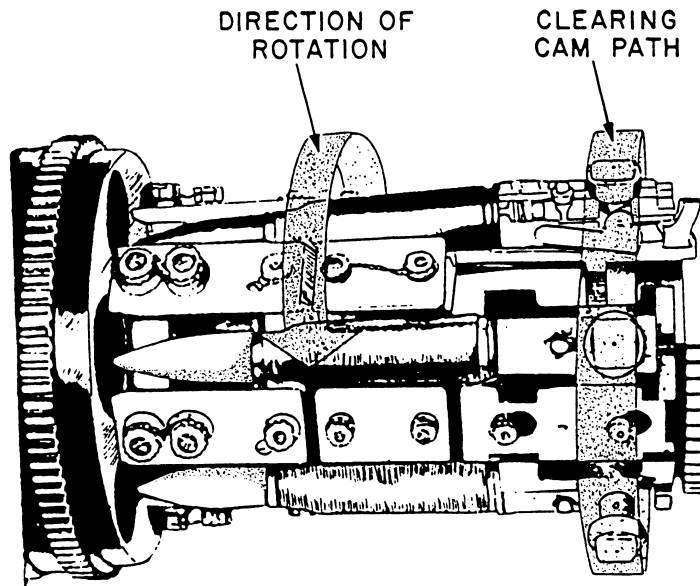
Breech-bolt assembly in clearing cycle.
